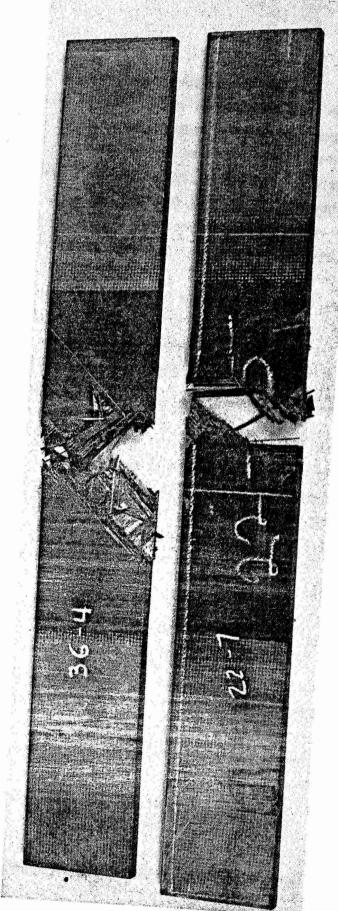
Typical Failure of Unnotched Crossplied Laminate Specimens.
